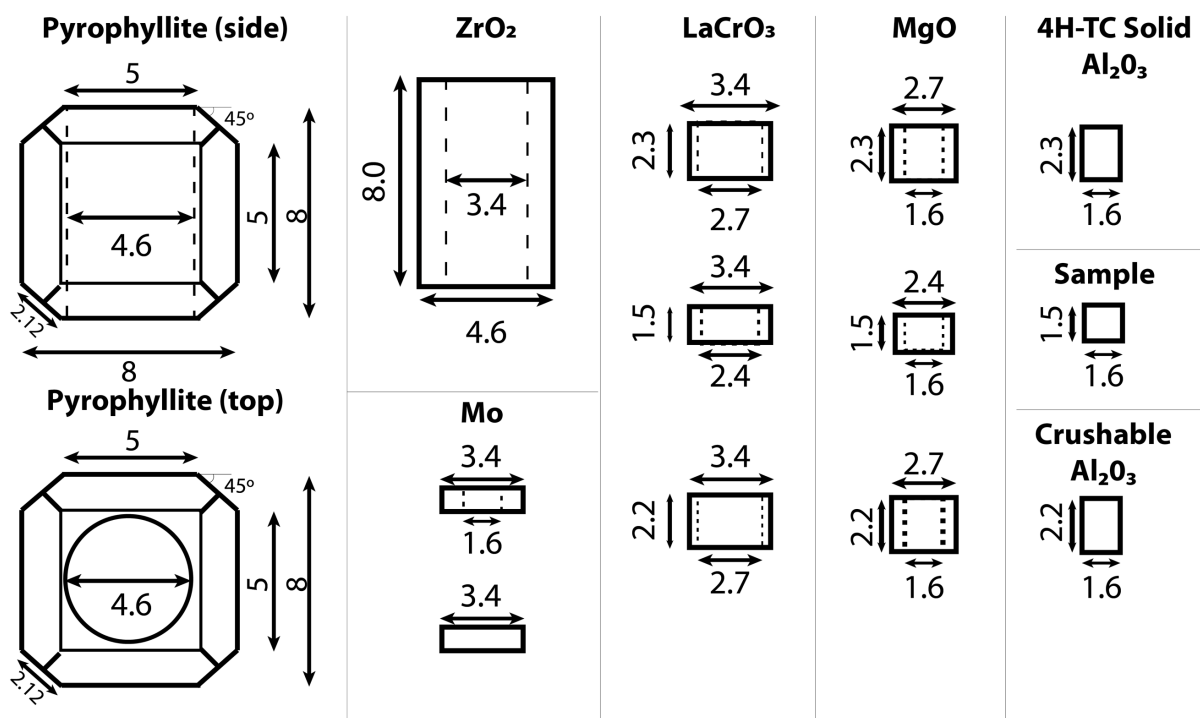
Dimensions of parts in a 8/5 deformation assembly. Dimensions are in mm.
